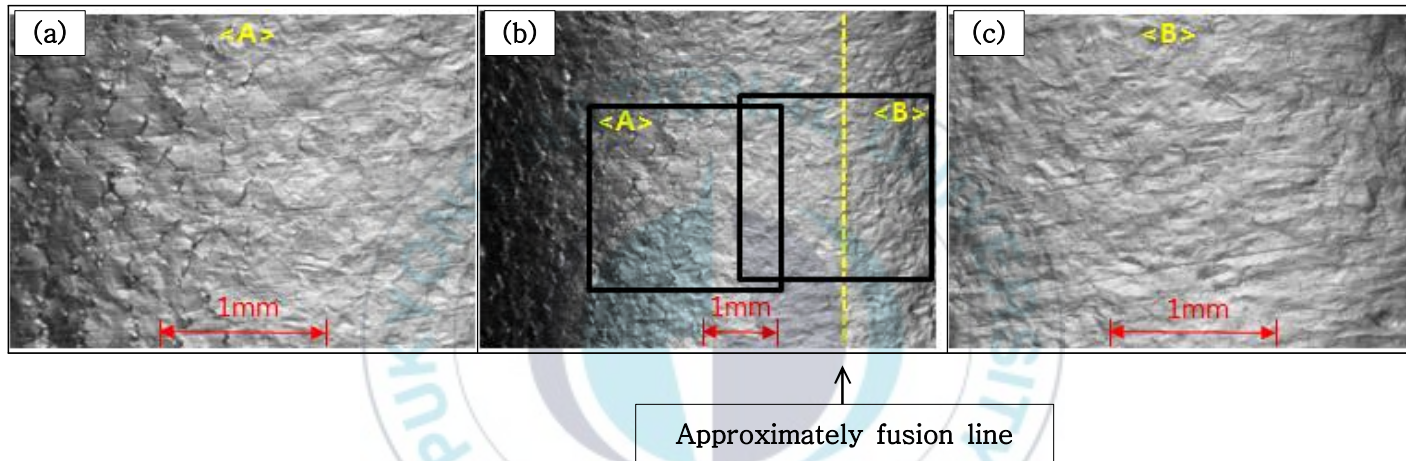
Detail view of HAZ on the bent area of coupon No.2 by ASTM A262 Practice E test (x10)
